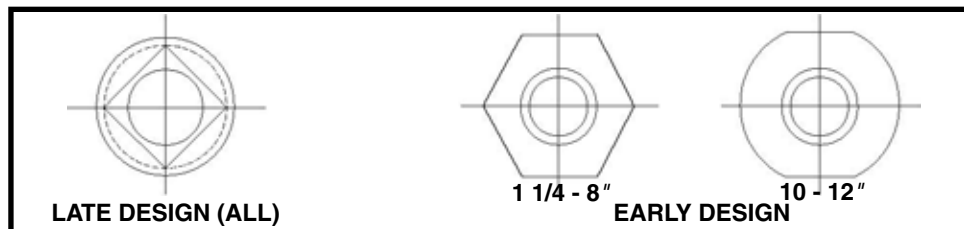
Weld-In-Line, Packing Gland Design (Frick®)
